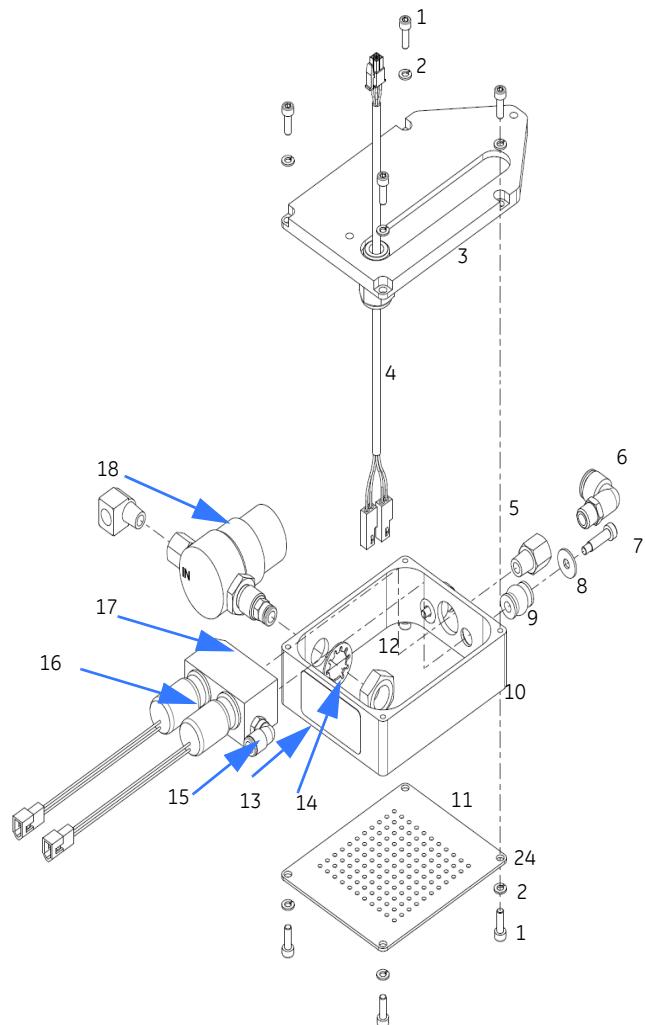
Servo Control Oxygen Sensor Housing Assembly
